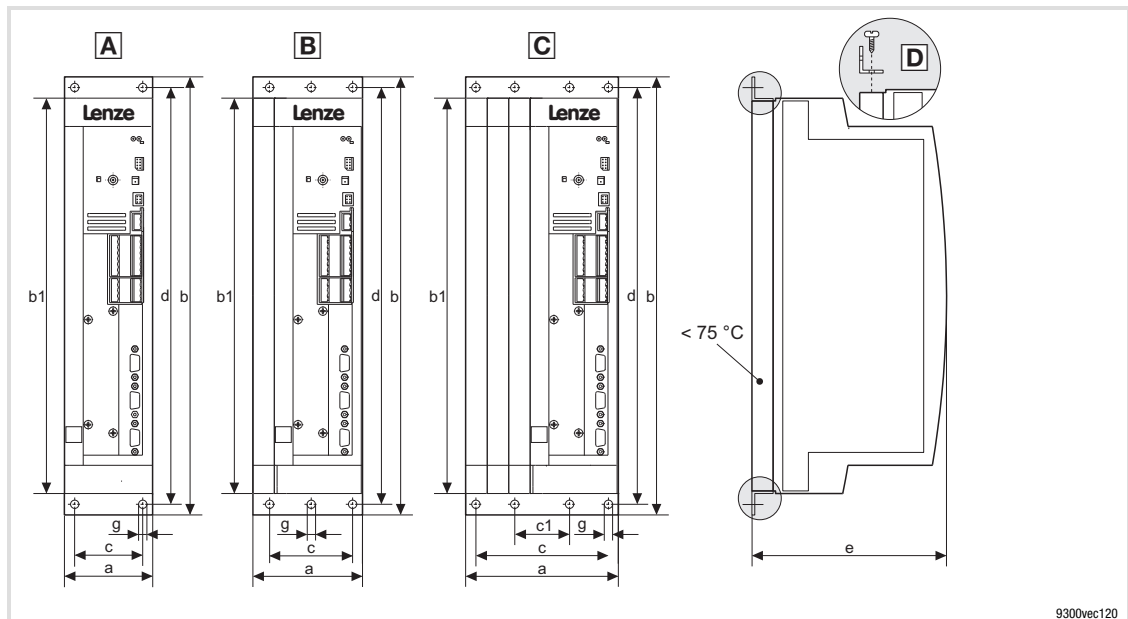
Dimensions for mounting in "cold plate" technique 0.37 ... 11 kW
